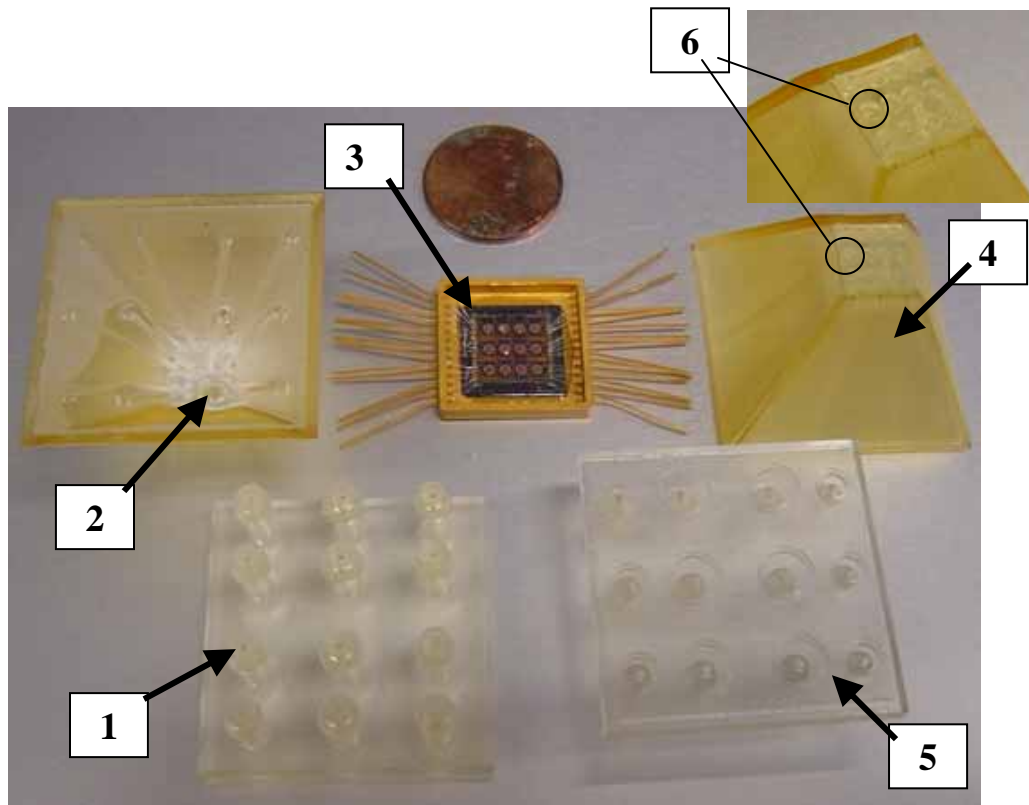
The parts required for packaging the microvalve: 1 = inlet hose connector; 2 = PDMS filled inlet fluidic channels, the top face is attached to the hose connector; 3 = 12 mm x 12 mm silicon chip consists of 12 fabricated microvalves, mounted on a gold plated package; 4 = PDMS filled fluidic channels, the top face is attached to the top surface of silicon chip; 5 = outlet hose connector; 6 = 12 x “bowl cavity” with the size of 2,000 μm in diameter and 300 μm depth, for the room of the microvalve structure”
